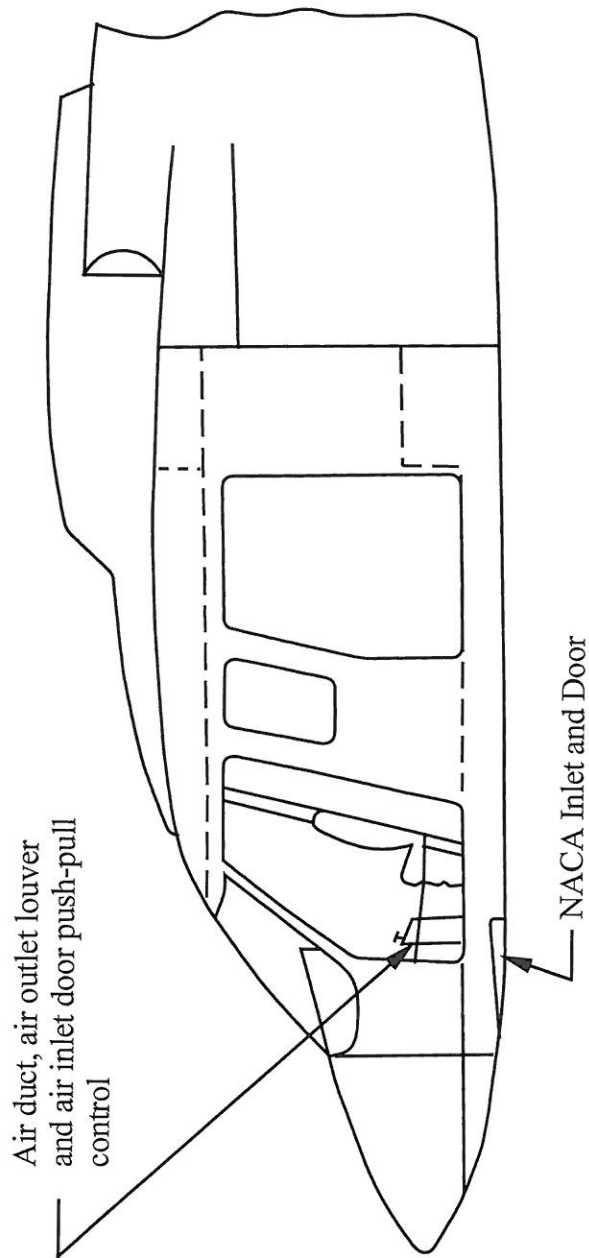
, General Arrangement, S-76 Flight Deck Ventilation System
